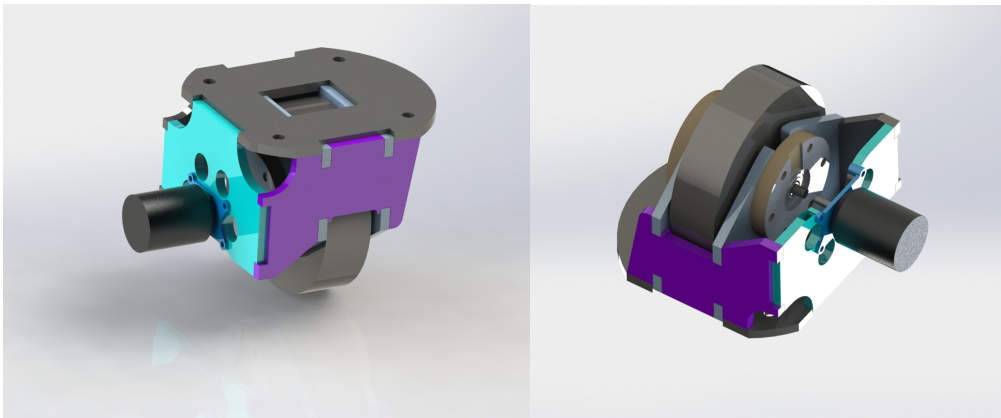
Complete self-balancing bicycle design with all single-axis gimbal gyro mechanical components assembled (left). Close up view of the gyro and gimballing mechanism (right).
